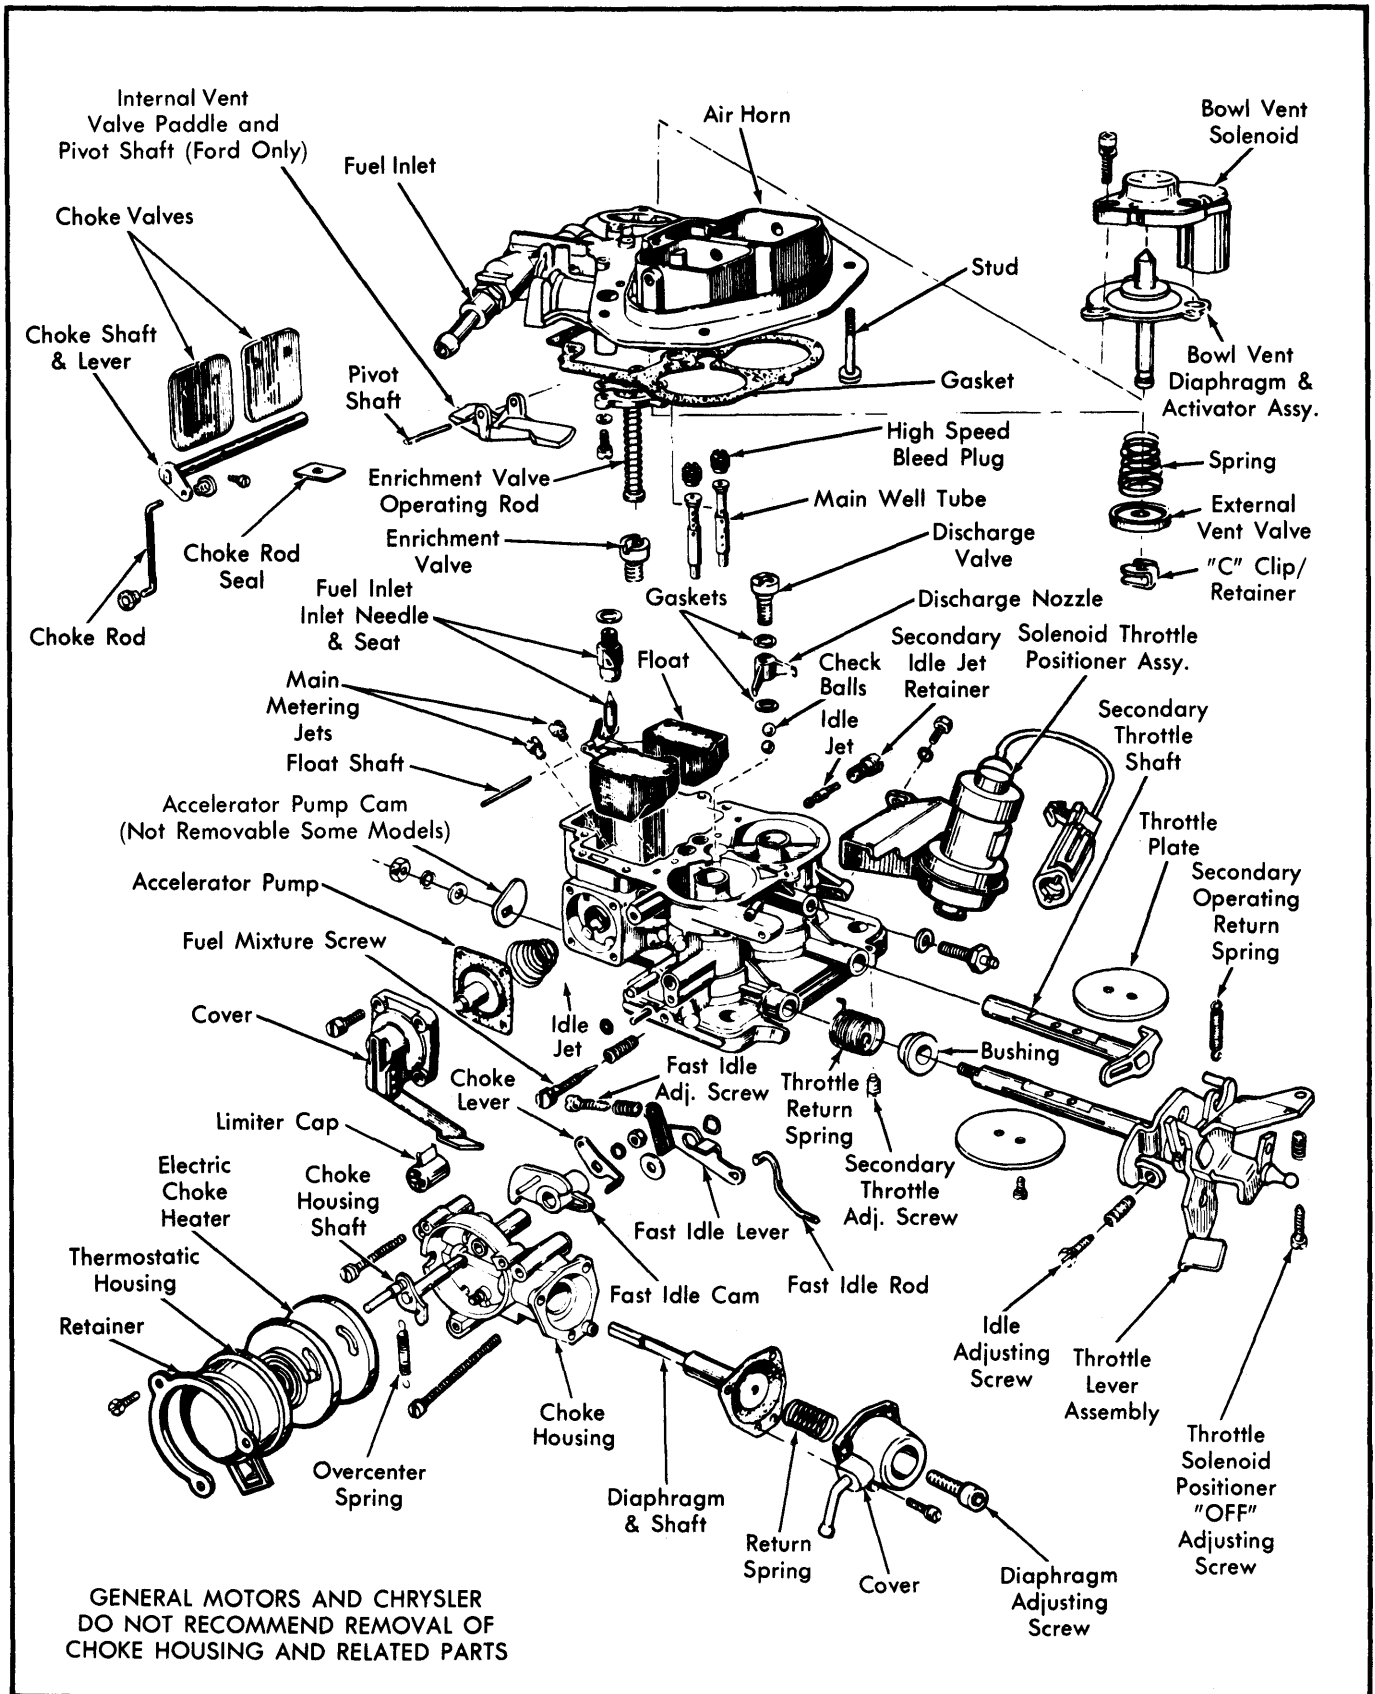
Exploded View of Holley Model 5200, 5210-C and 5220 2-Barrel Carburetor
